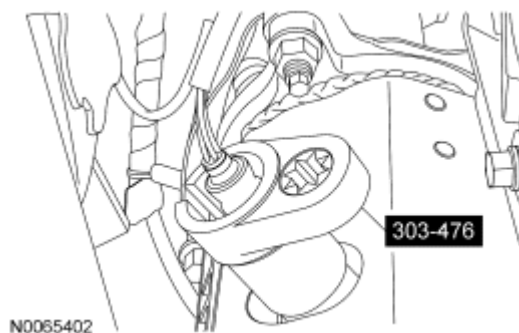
Removing Catalyst Monitor Sensor Using Special Tool (303-476)
